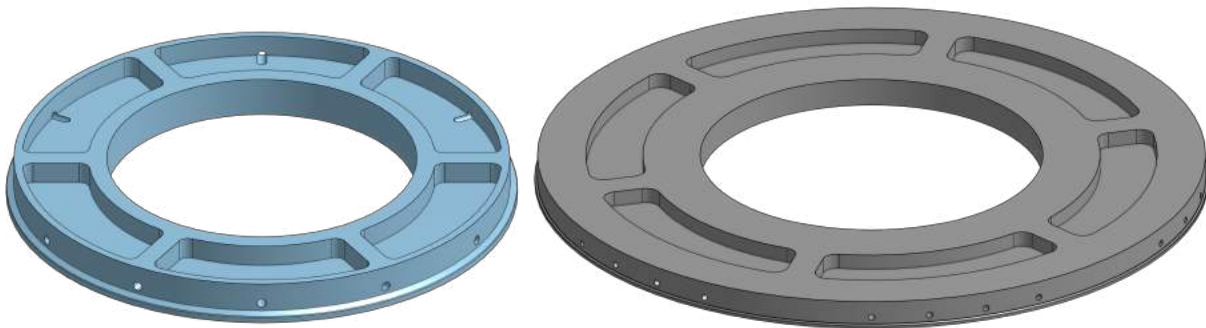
LEFT: LV3.1 thrust plate. RIGHT: LV4 thrust plate with extruded outer walls and fastener hole pattern matching that of a coupling ring.
